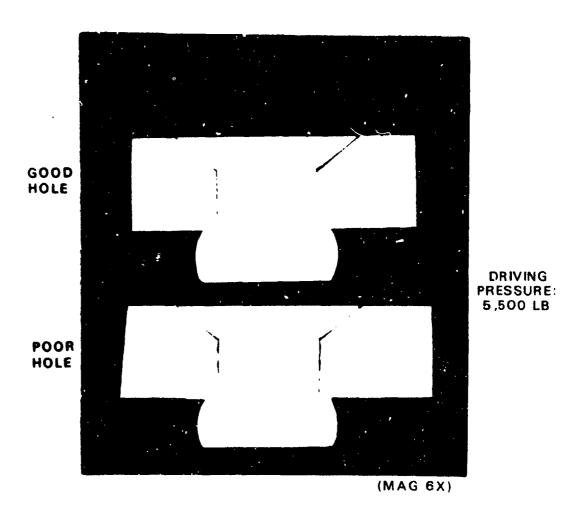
Photomacrographs of Sectioned 3/16-in. Diameter 2024-T31 Rivets
